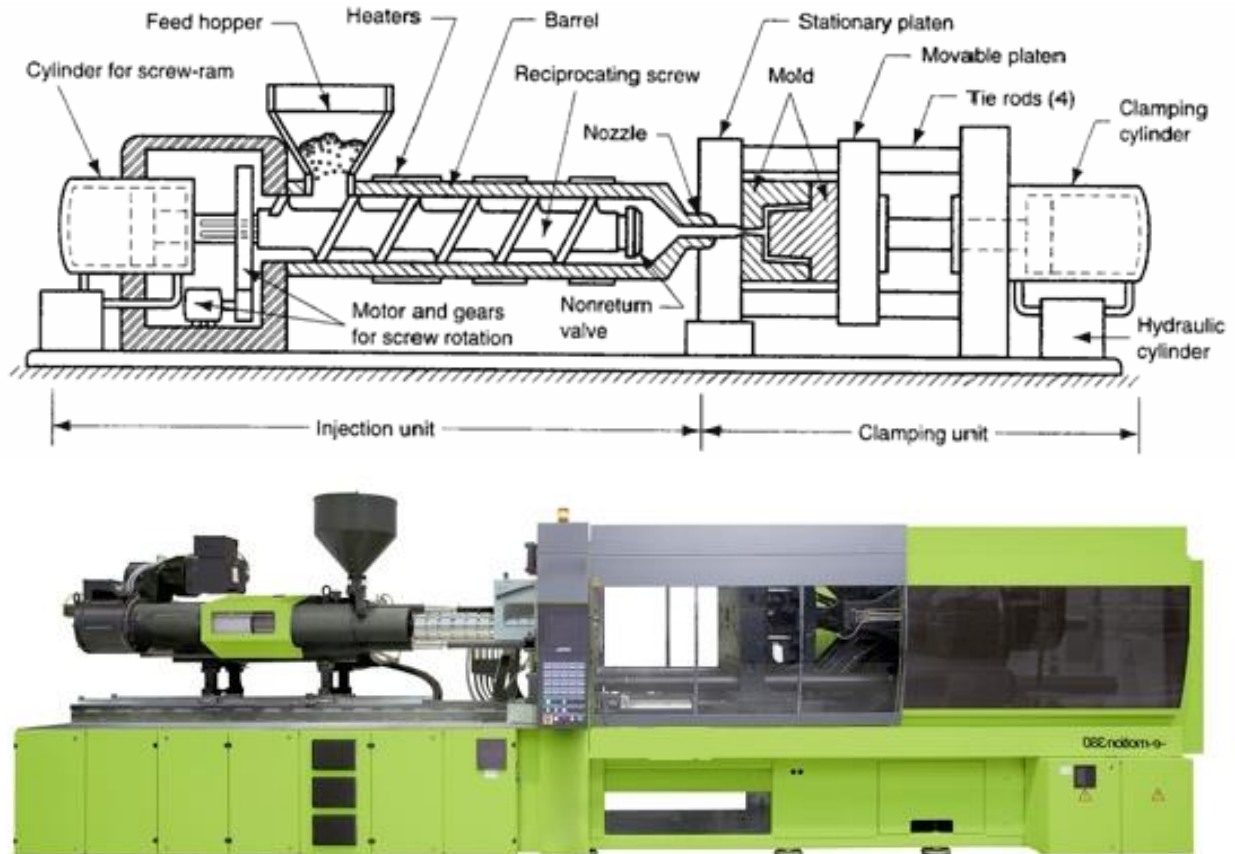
^{2,3}: Schematic representation of an injection molding machine (above); photograph of an injection molding machine (below).
